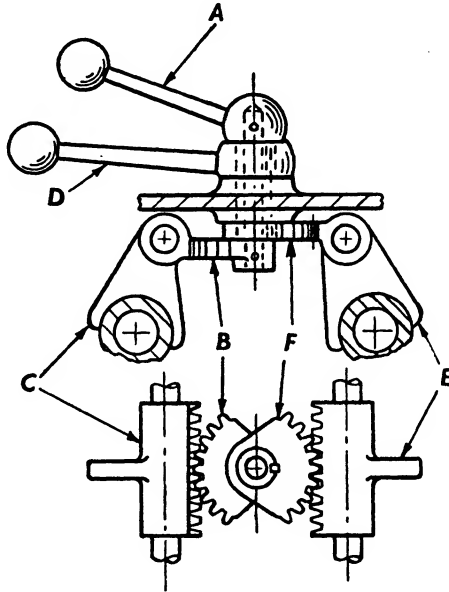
GEAR CHANGE MECHANISM WITH CO-AXIALLY MOUNTED LEVERS
